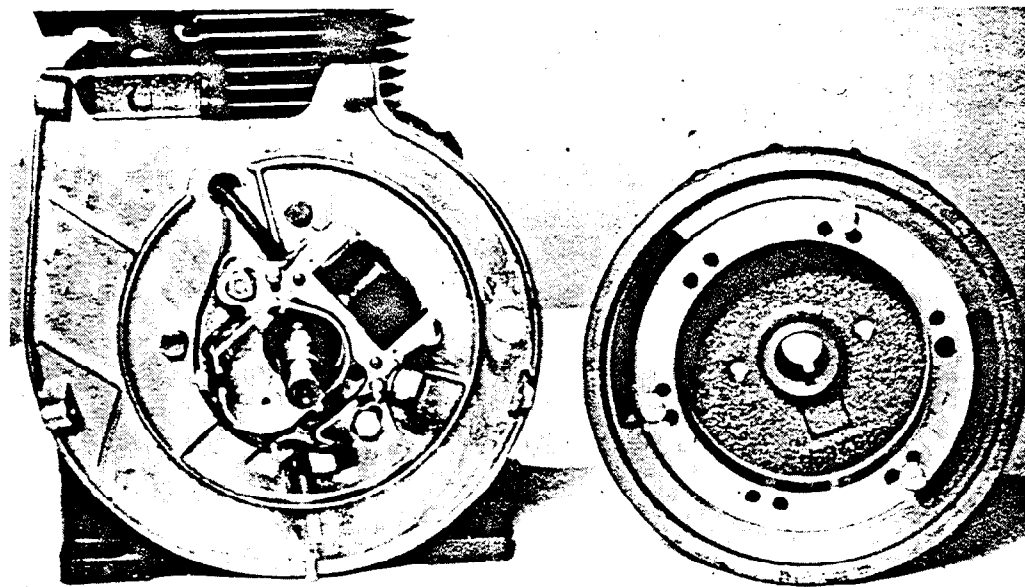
FLYWHEEL MAGNETO - ALTERNATOR
